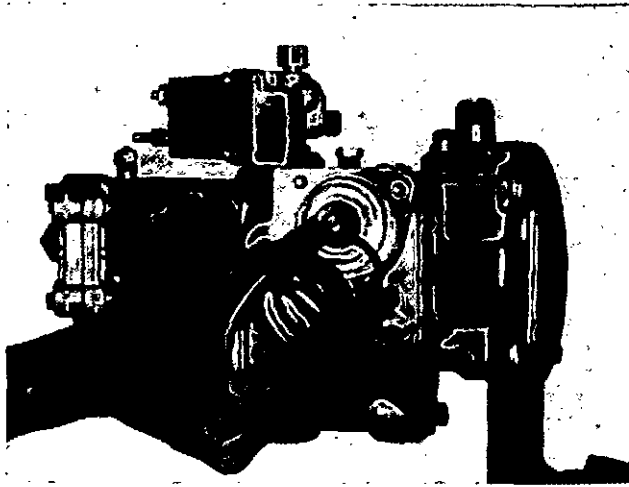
, (F5303). Remove the AFC bellows spring and washer.
